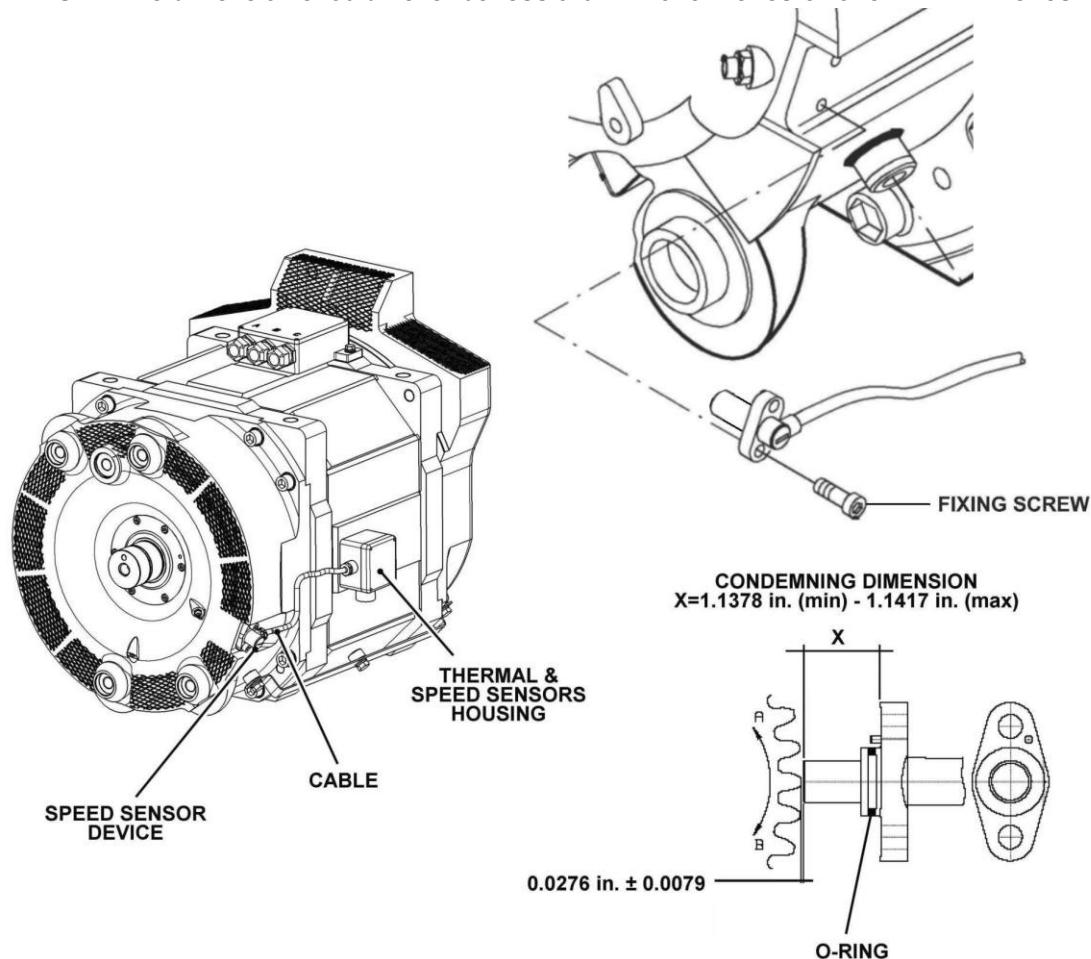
TRACTION MOTOR SPEED SENSOR GAP CHECKING
